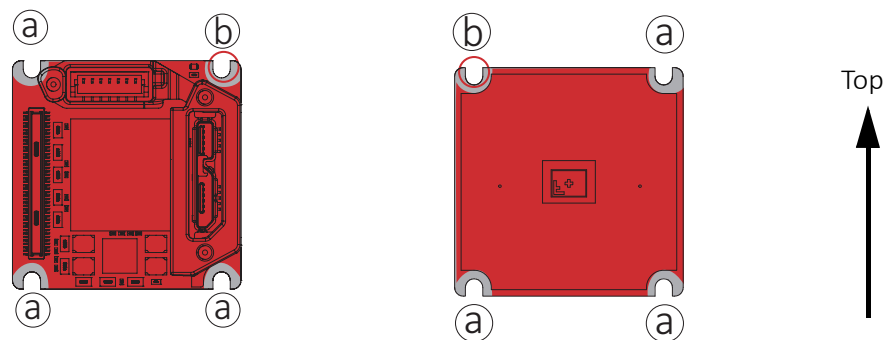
Mounting area of Alviium USB bare board cameras connector side (left); sensor side (right)
